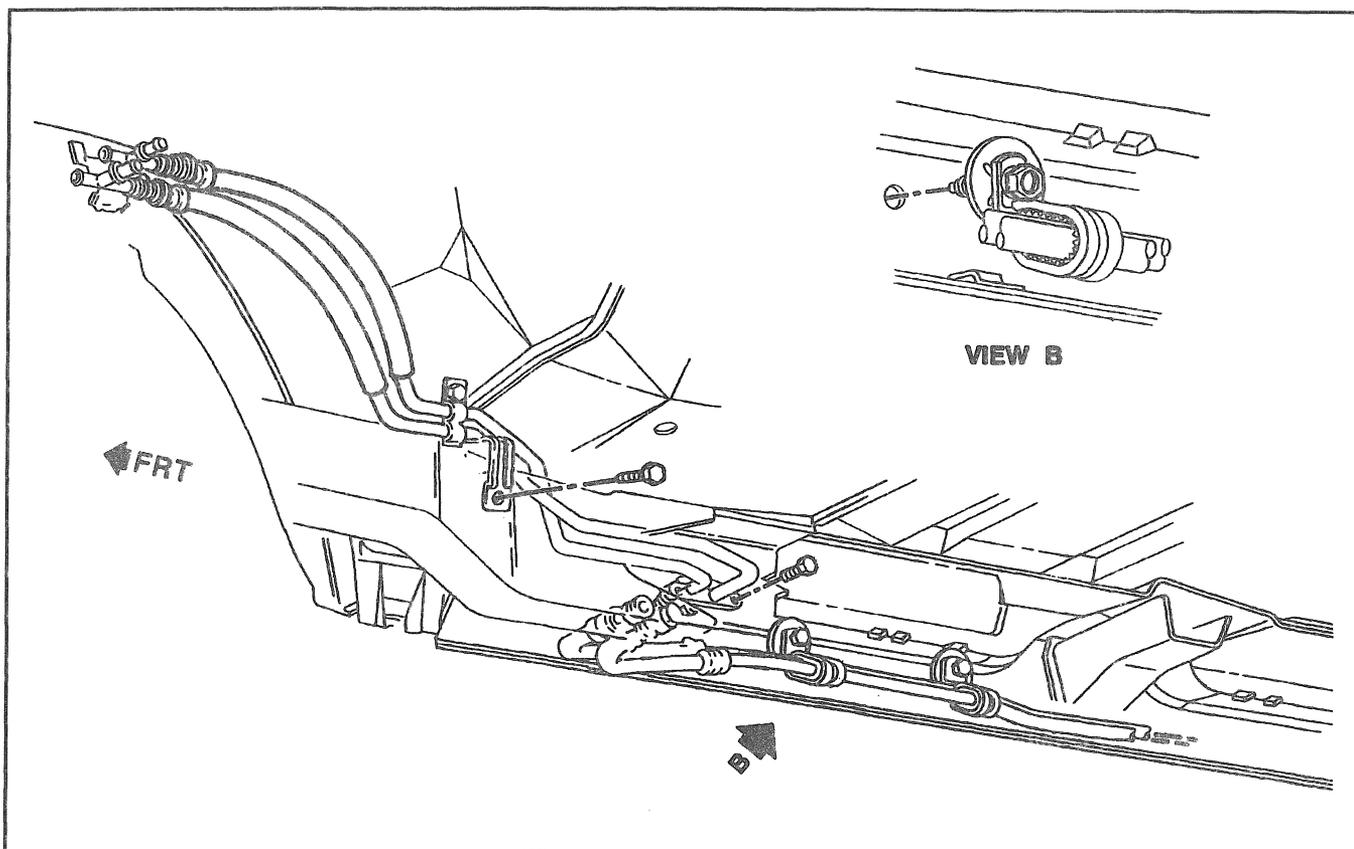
Auxiliary Heater Hose Assembly Routing (Front)
